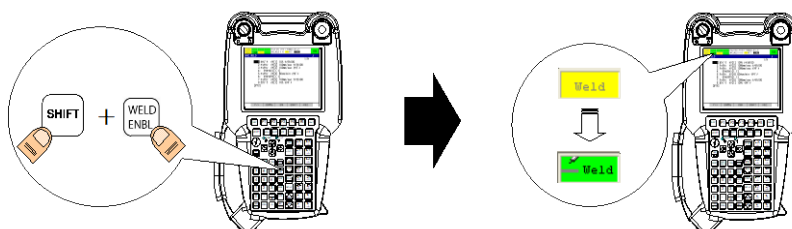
(a) Switch to Weld Enabled
